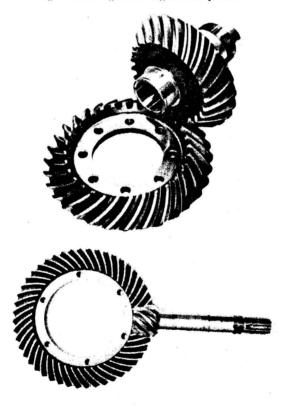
Two types of spiral bevel sets, consisting of spiral bevel gear and pinion.
